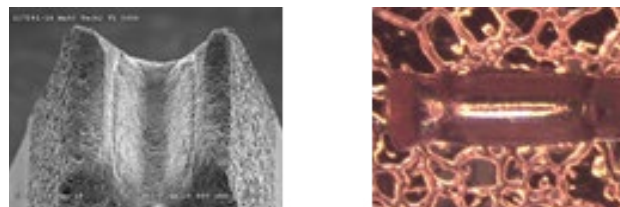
Bond tool and bond produced after 500,000 bonds of 16 mil Cu wire.
